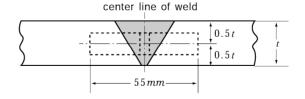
Position of Butt Weld Impact Test Specimen (Unit: mm, t: plate thickness)
